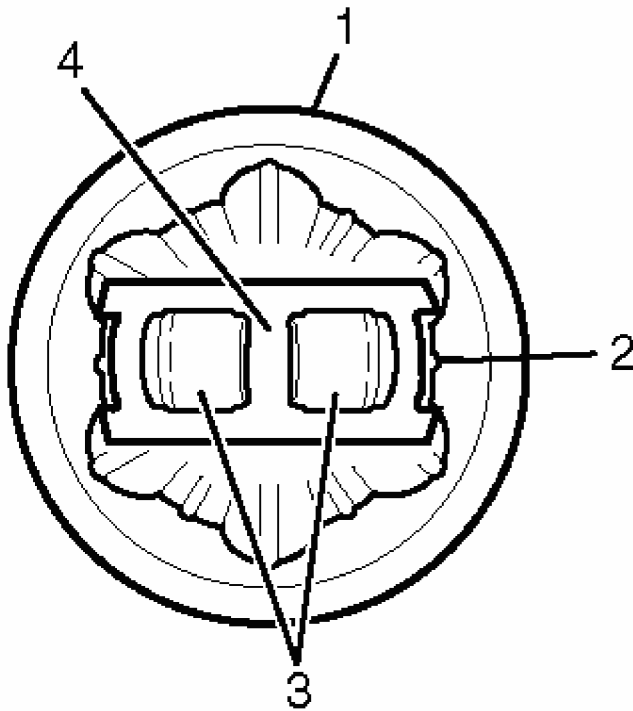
View Of Outer Race, Inner Race, Cage Window & CV Joint Cage
